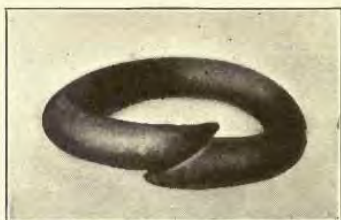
SHOWING SCARFS ON LAP WELD OF RING.
